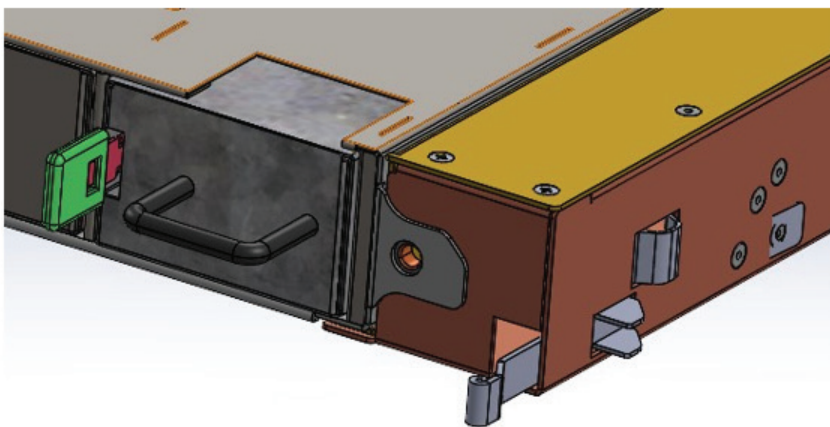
Fasten with provided M6 mounting hardware through front hole
